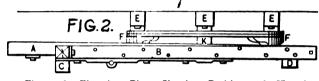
Elevation Plan, Showing Positions of Hounds, Futchels and Fifth Wheel.
